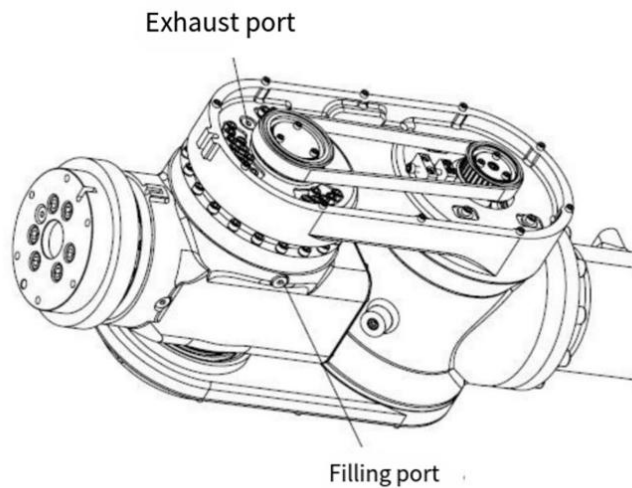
Lubricant Replacement for J5 Shaft Reducer
